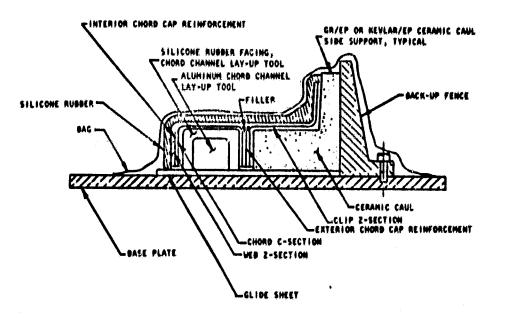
Baseplate Tooling Concept Truss Rib Caps
